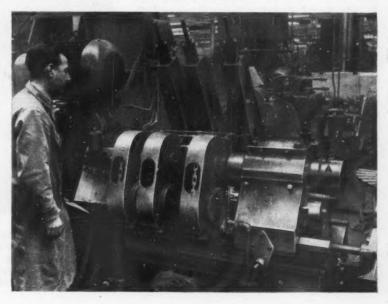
A General View of the Davis & Thompson Rotary Milling Machine for Rough- and Finish-milling Operations on the Shaft Ends. The Shafts are Carried Continuously Past the Cutters at Each End of the Central Carrier
